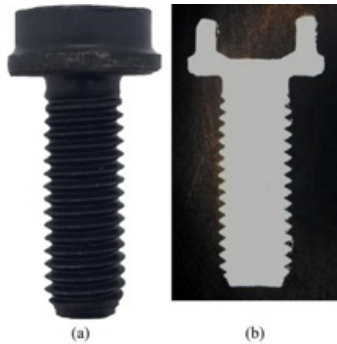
(a) Bolt specimen produced by cold forging and (b) cross-section view.
